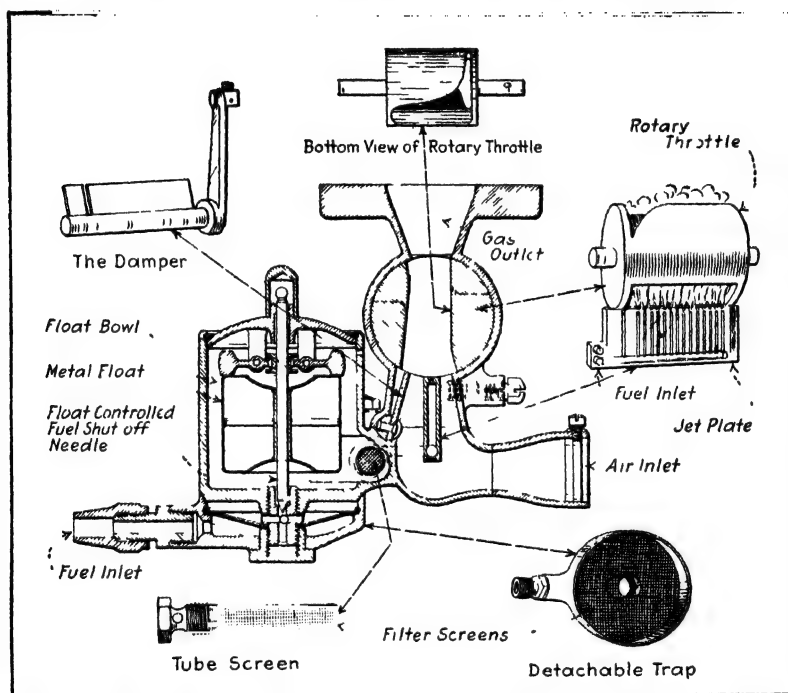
Outline Drawings of Various Master Carburetor Parts Showing the Location in the Main Assembly. Note Unusual Form of Spray Nozzles.
